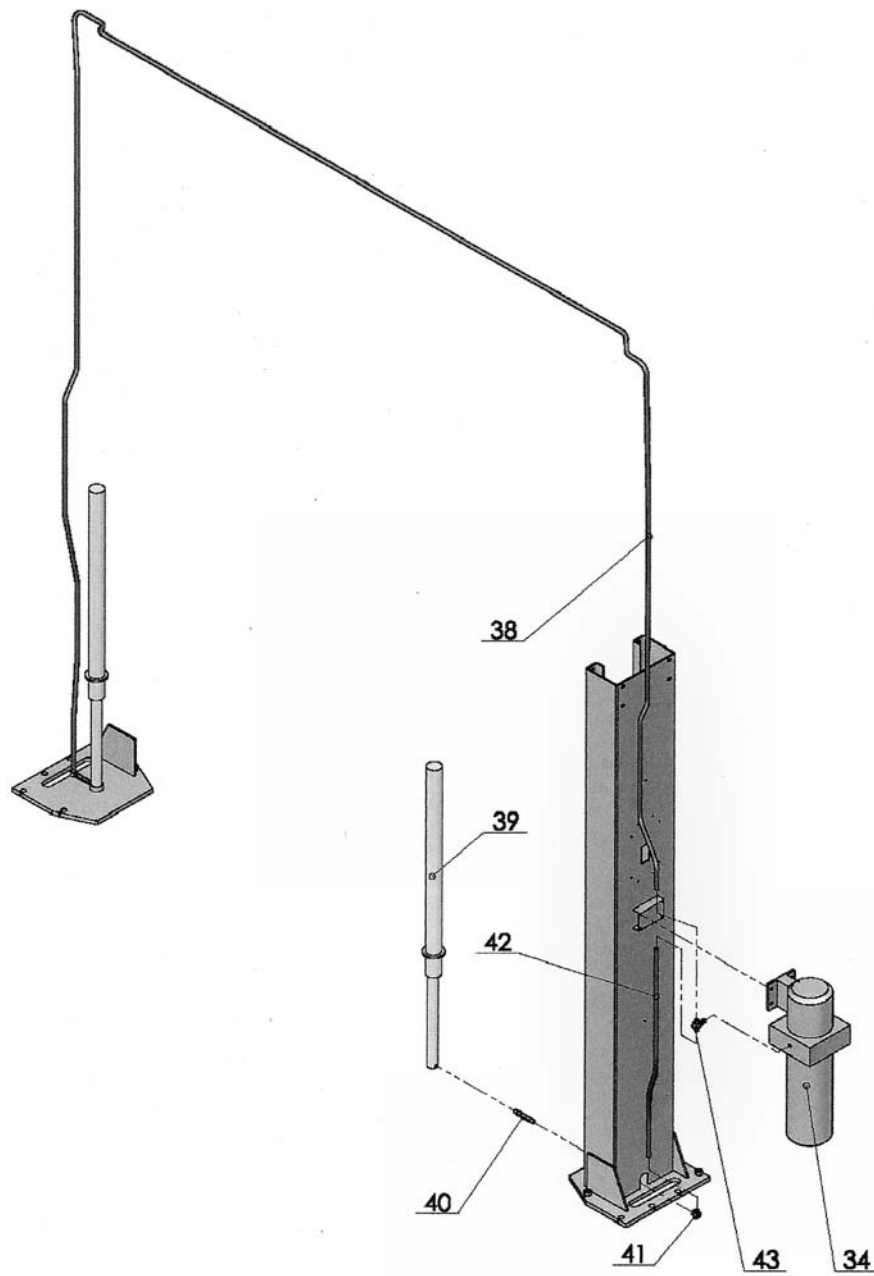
Illustrated Parts Breakdown – Sheet 3 of 6
